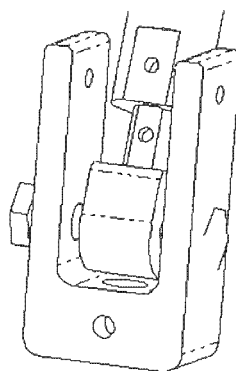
3-D view of the knee-end attachment of the thigh extension, including a locating face and dimple set at the minimum distance.
